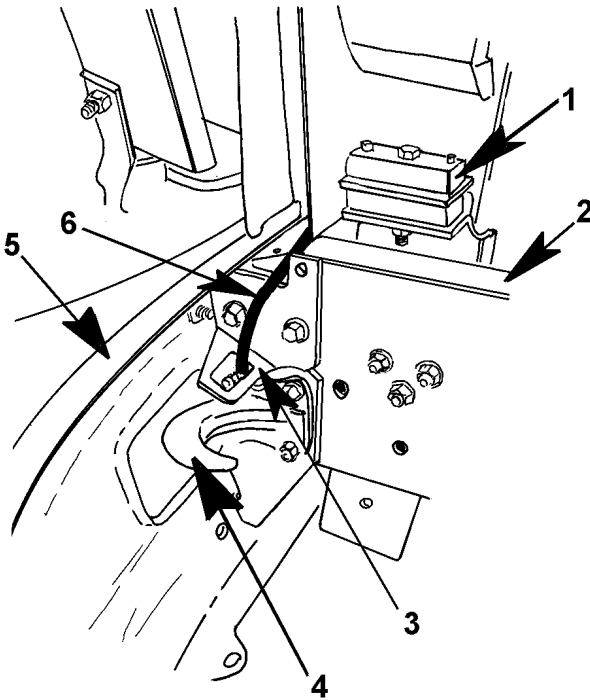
Torsion Bar Bracket (Drivers Side Shown)
